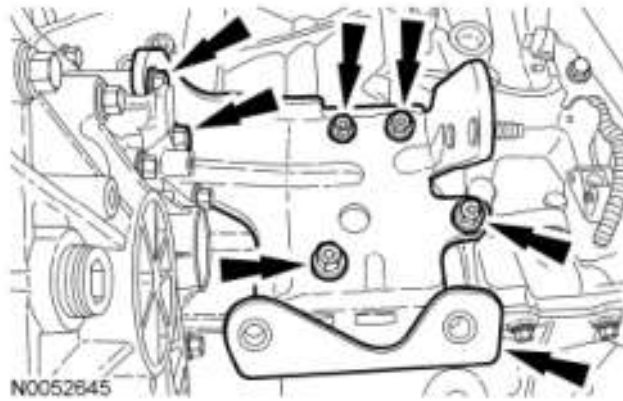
Locating Transfer Case-To-Engine Bracket Bolts
